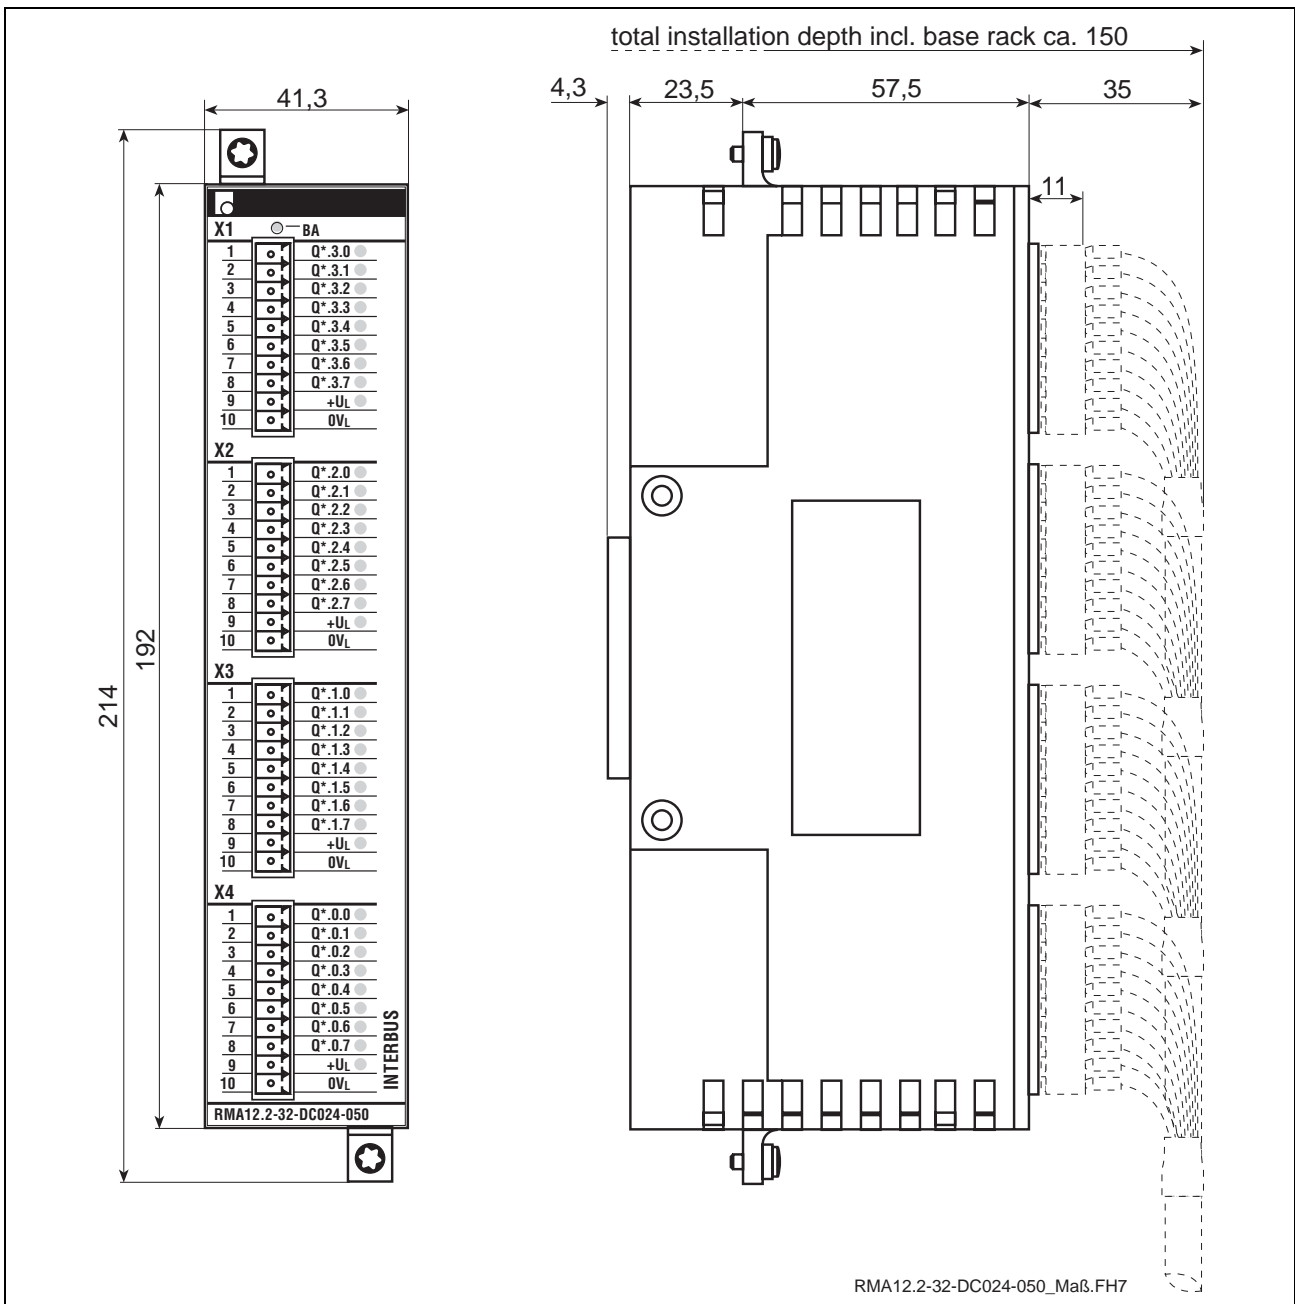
Mounting dimensions of RMA12.2-32-DC024-050
